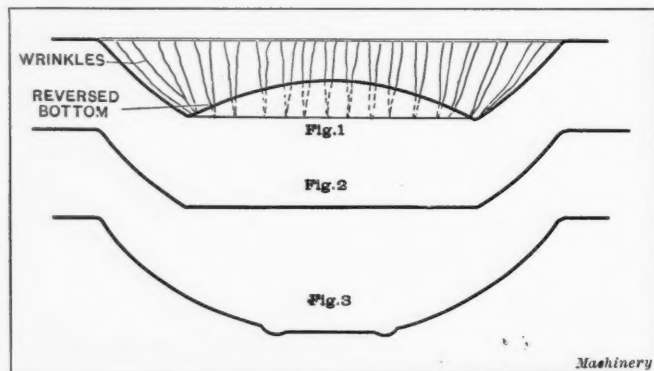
Cover produced by Old Method of Drawing in One Operation, causing Wrinkles, even with Reversed Bottom. Fig. 2. First Stage in Drawing Cover in One Operation. Fig. 3. Finished Cover
